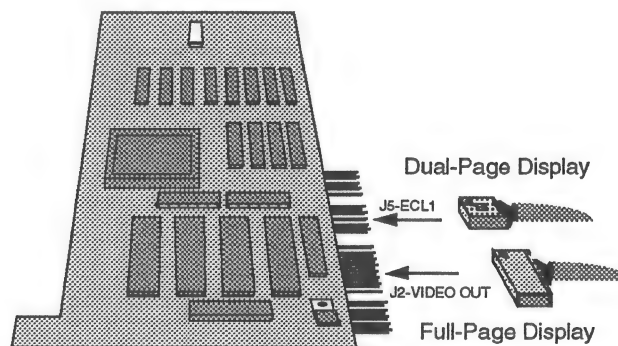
Connecting video output adapter and DB-9 cable to the video card
